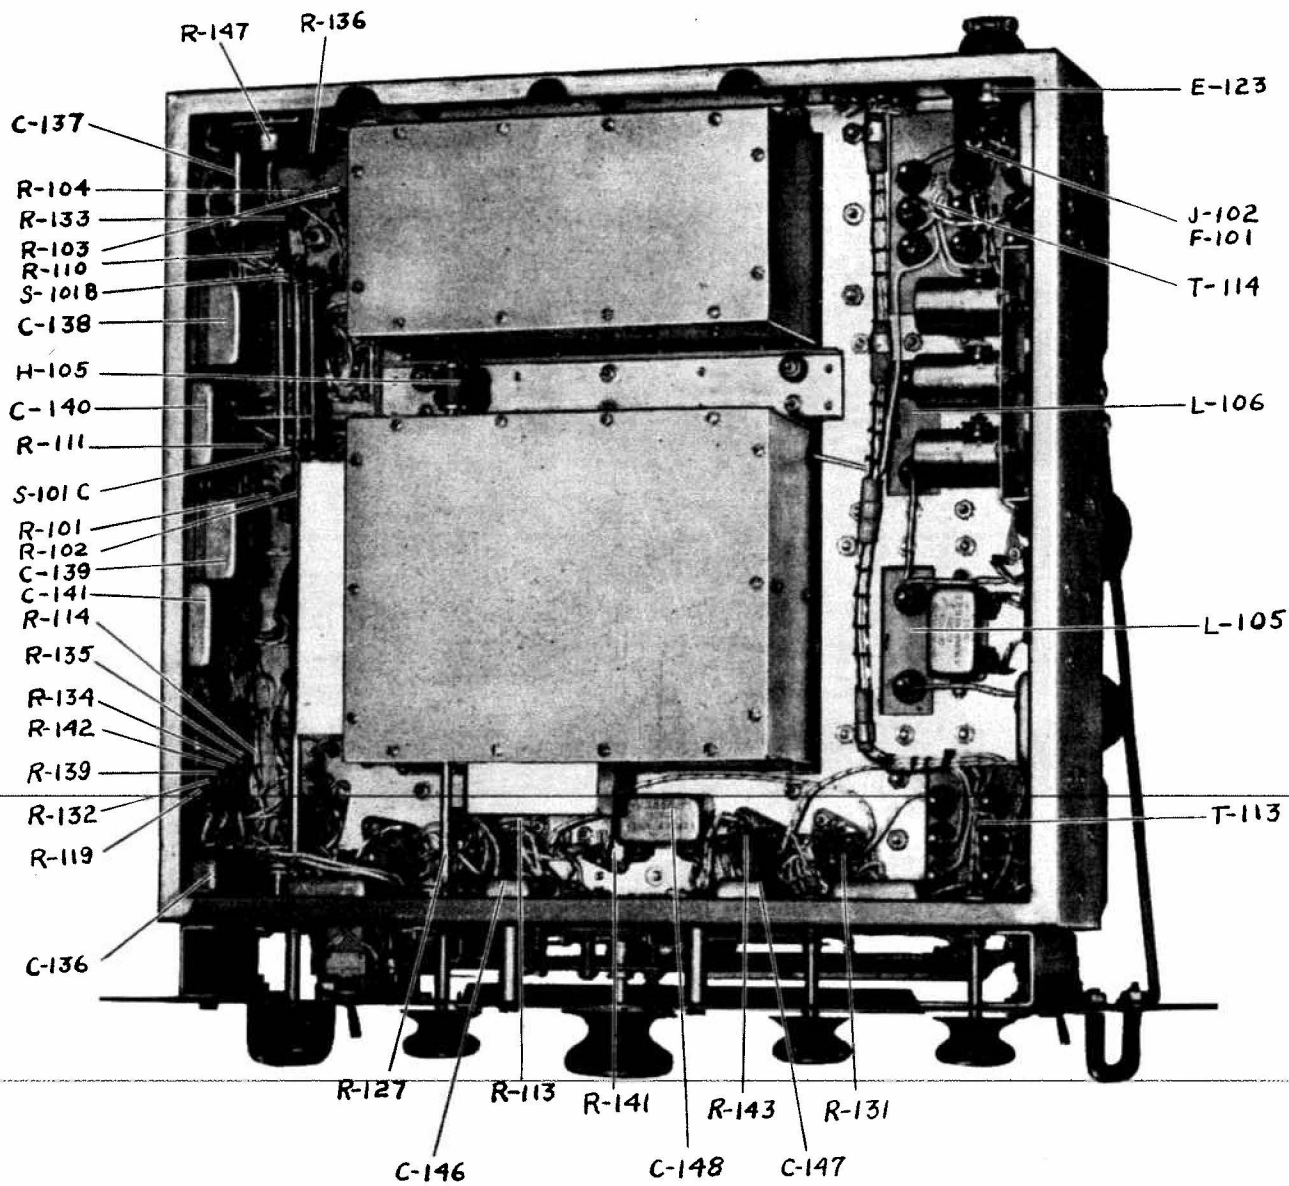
LEFT BOTTOM OBLIQUE VIEW, RECEIVER CHASSIS, BOTTOM COVER PLATE REMOVED.
